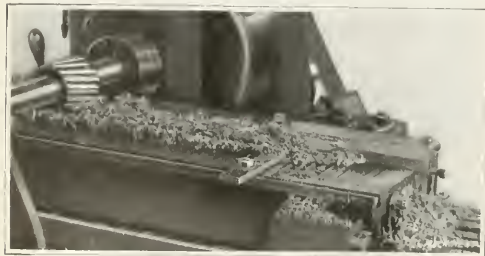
Horizontal Milling Operation performed with Aid of Magnetic Chuck
